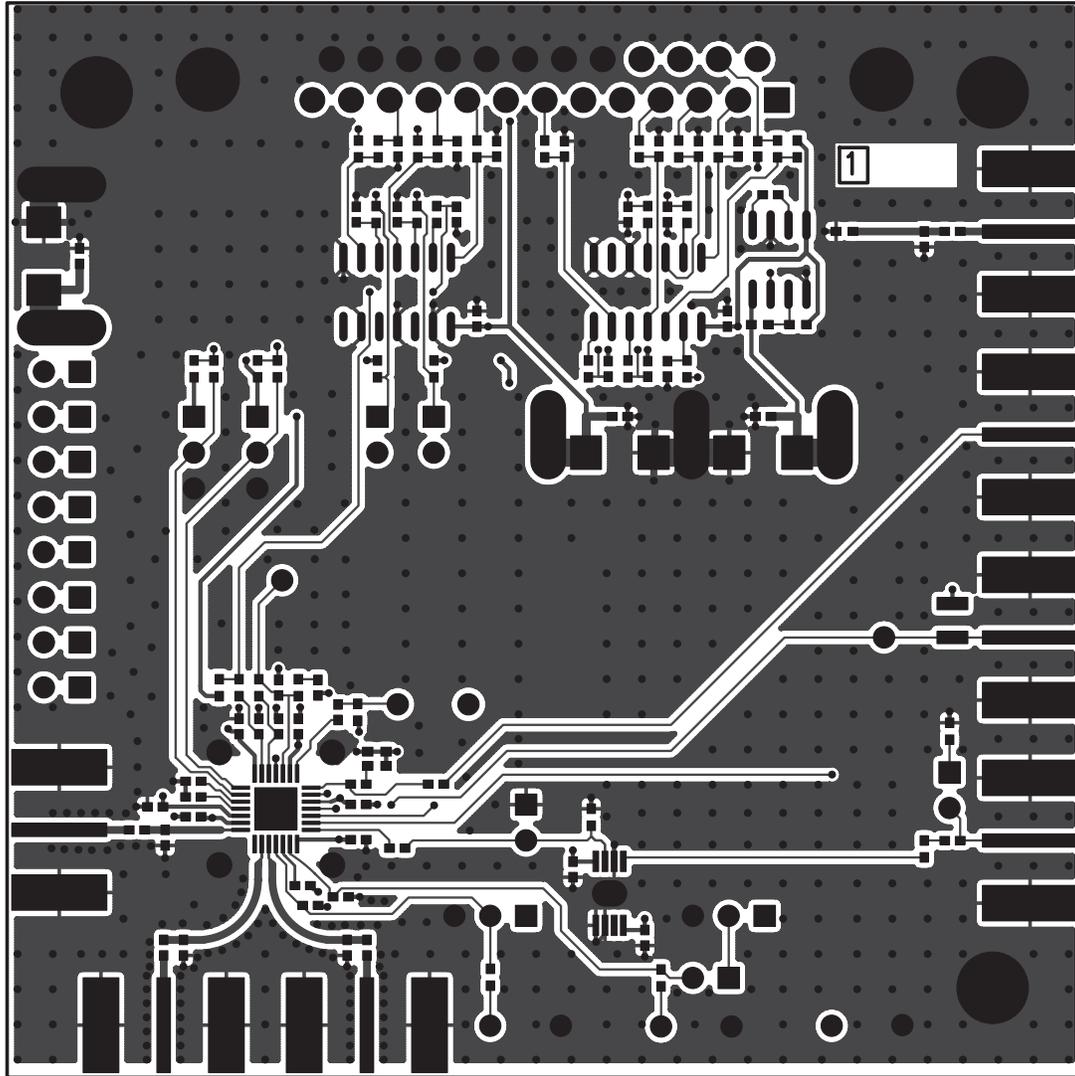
MAX2163 TQFN EV Kit PCB Layout—Primary Component Side
